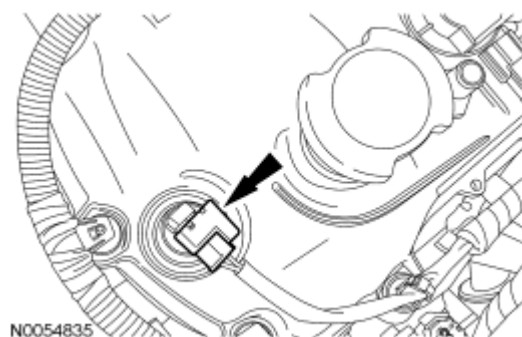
Locating LH VCT Solenoid Electrical Connector
